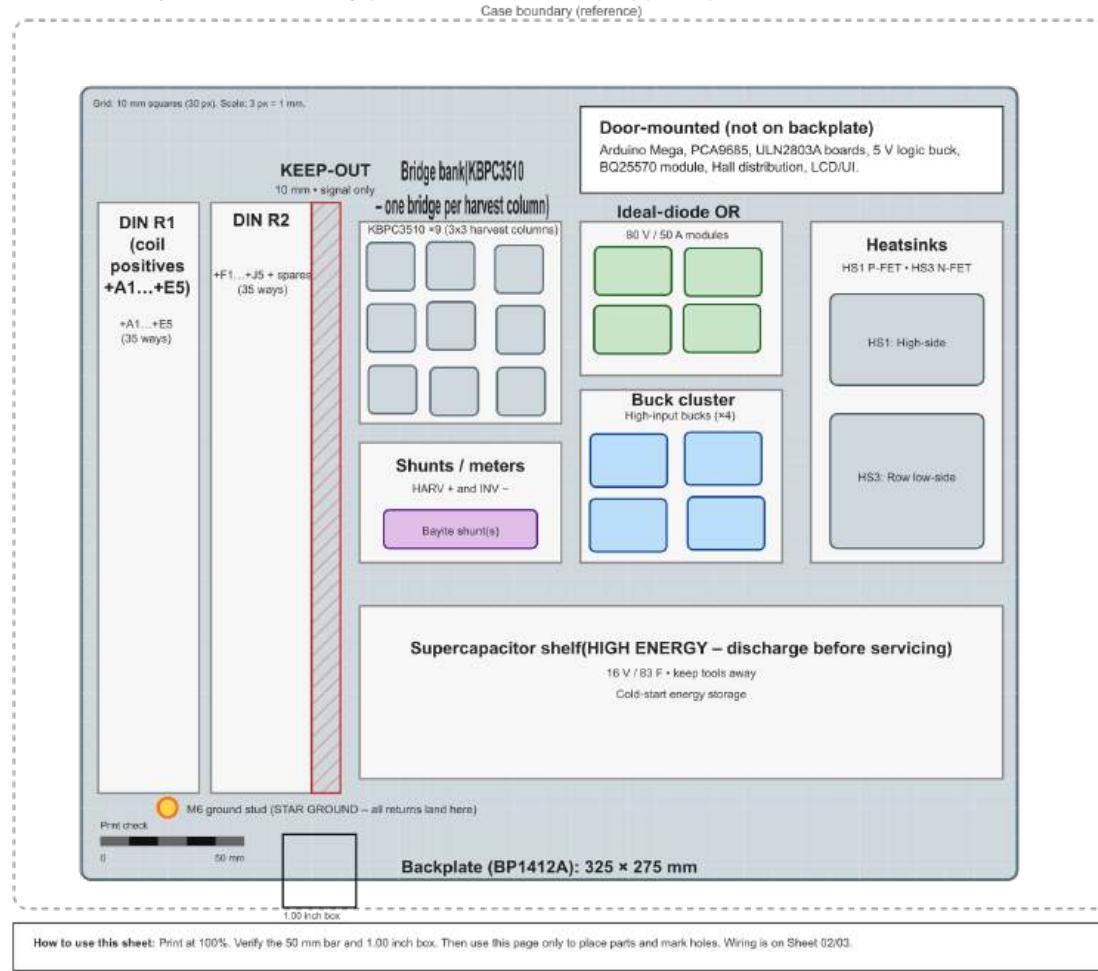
Enclosure Master Layout — Physical Mounting Overview (Sheet 01)
